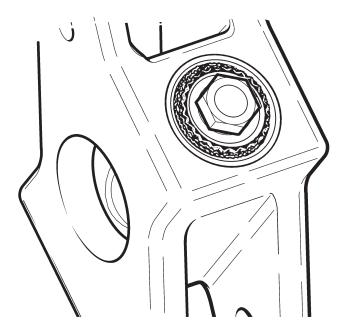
B ELASTOMER OIL CONTAMINATION
